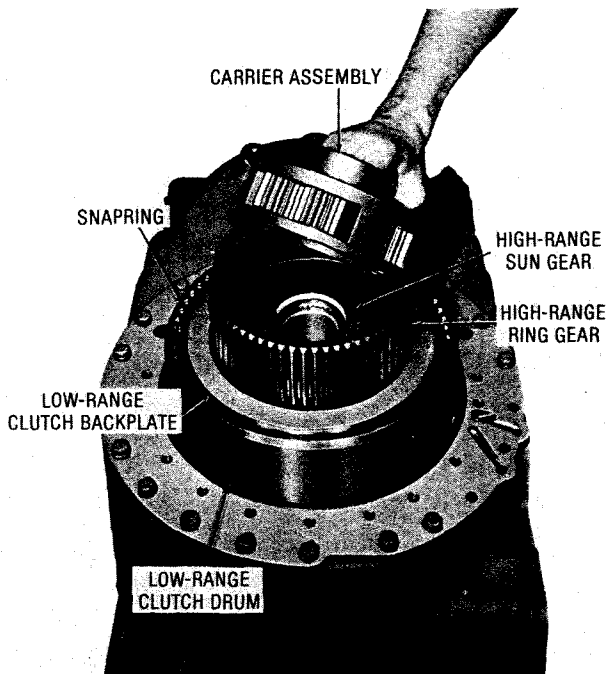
Installing high-range planetary carrier assembly (TRT-1)
